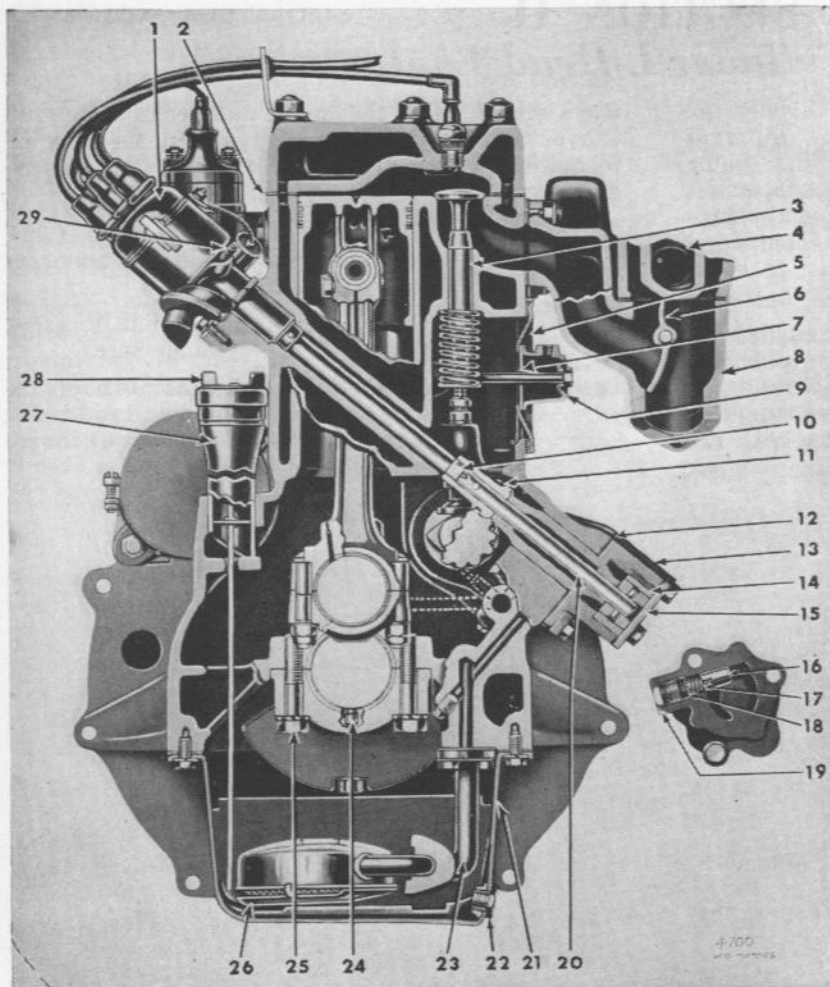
FOUR CYLINDER L-HEAD ENGINE—END VIEW
